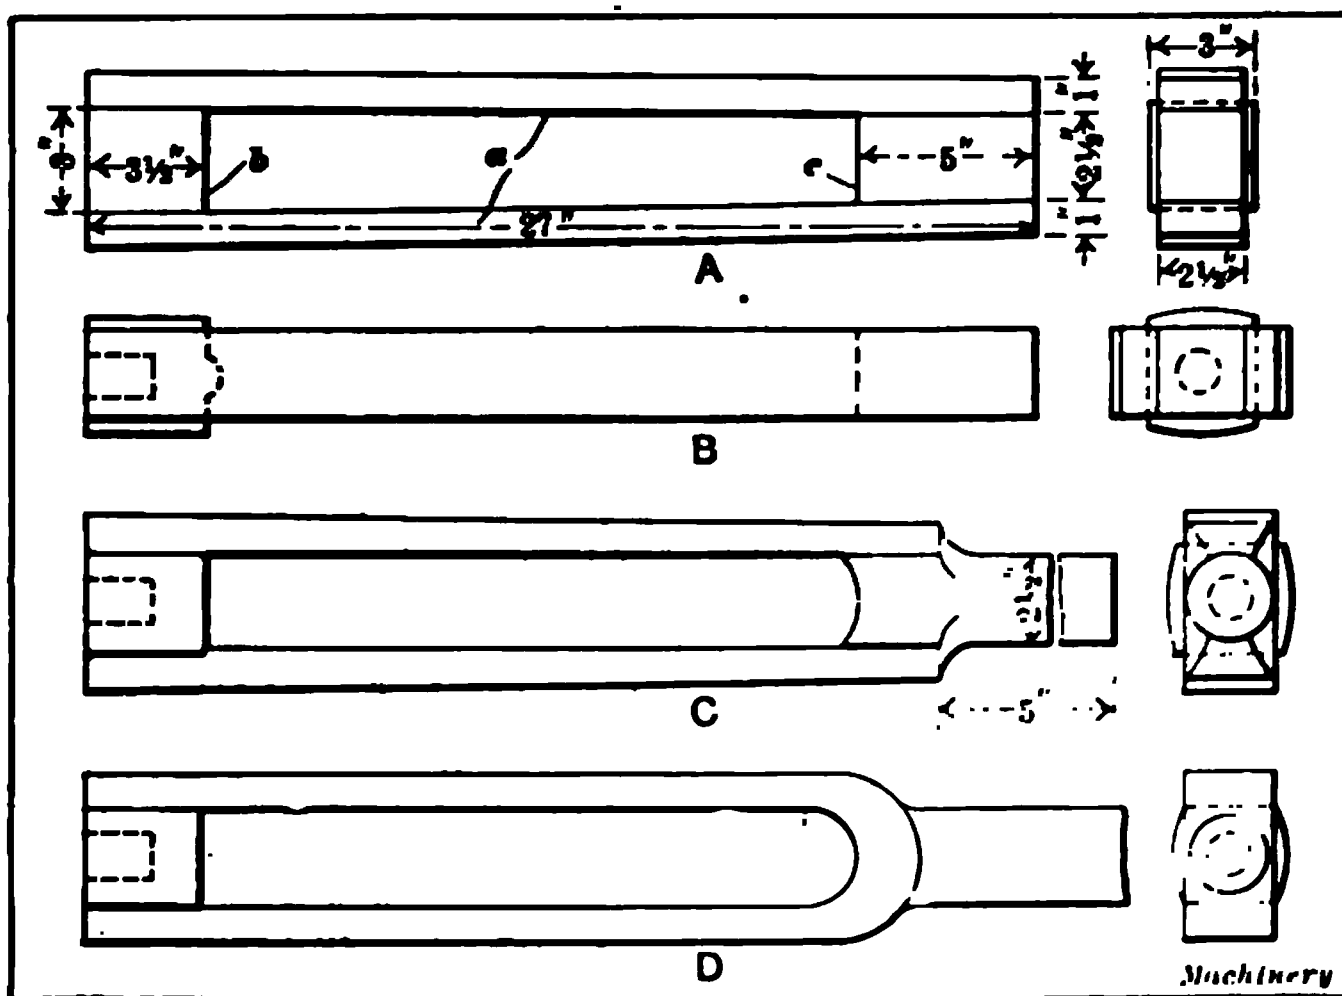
Sequence of Operations performed on the Slot End of the Main Driver-brake Pull Rod shown at E in Fig. 25
